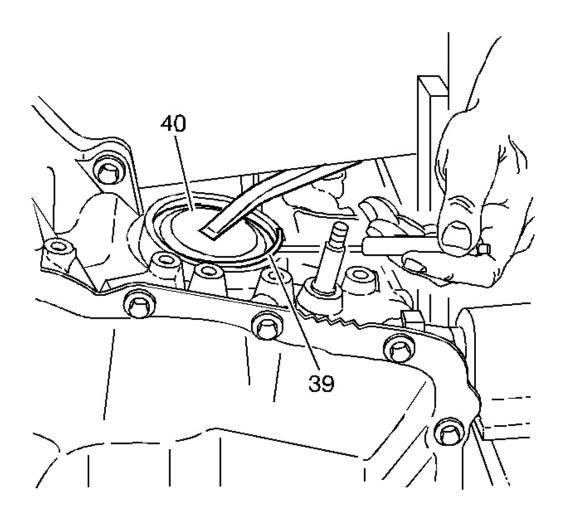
Removing/Installing Reverse Servo Cover Snap Ring Courtesy of GENERAL MOTORS CORP.
